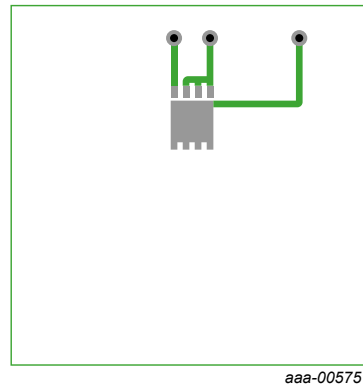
PCB layout for thermal resistance junction to ambient minimum footprint; FR4 Board; 2oz copper
